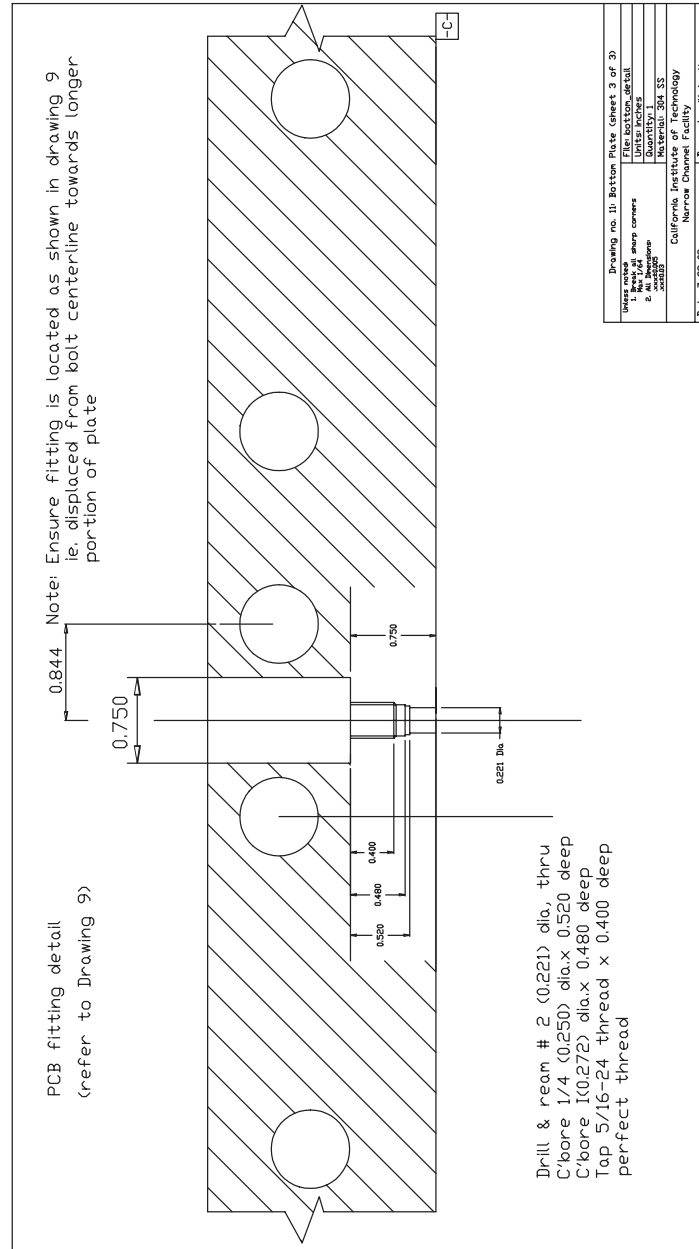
Bottom Plate (sheet 3 of 3), Dwg No. 11
